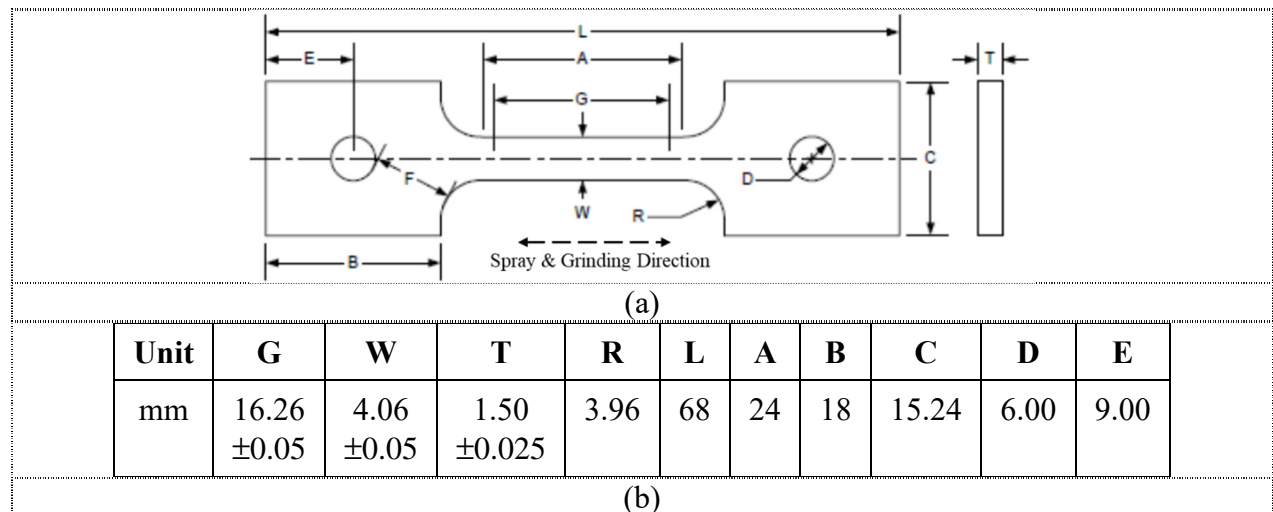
(a) Shape and (b) dimensions of the flat dog-bone sample for tensile test.
